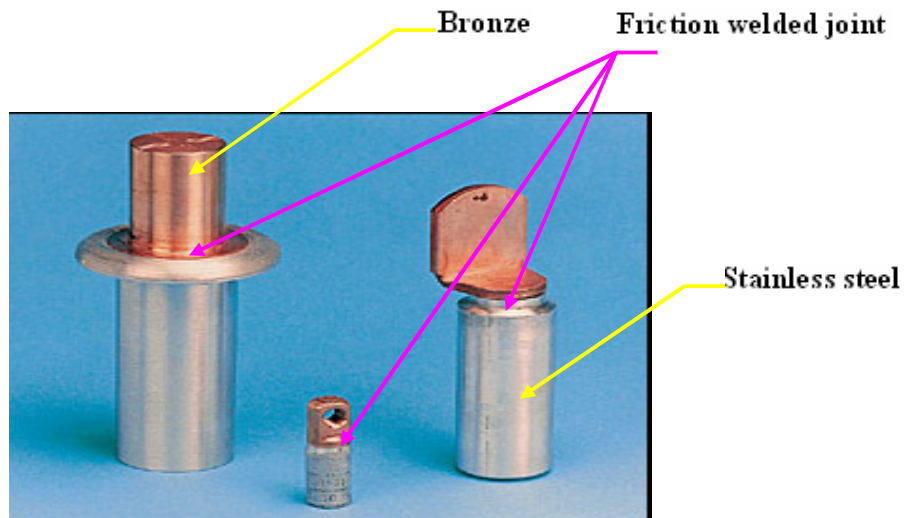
Friction welding of Bronze & Stainless steel [6]
